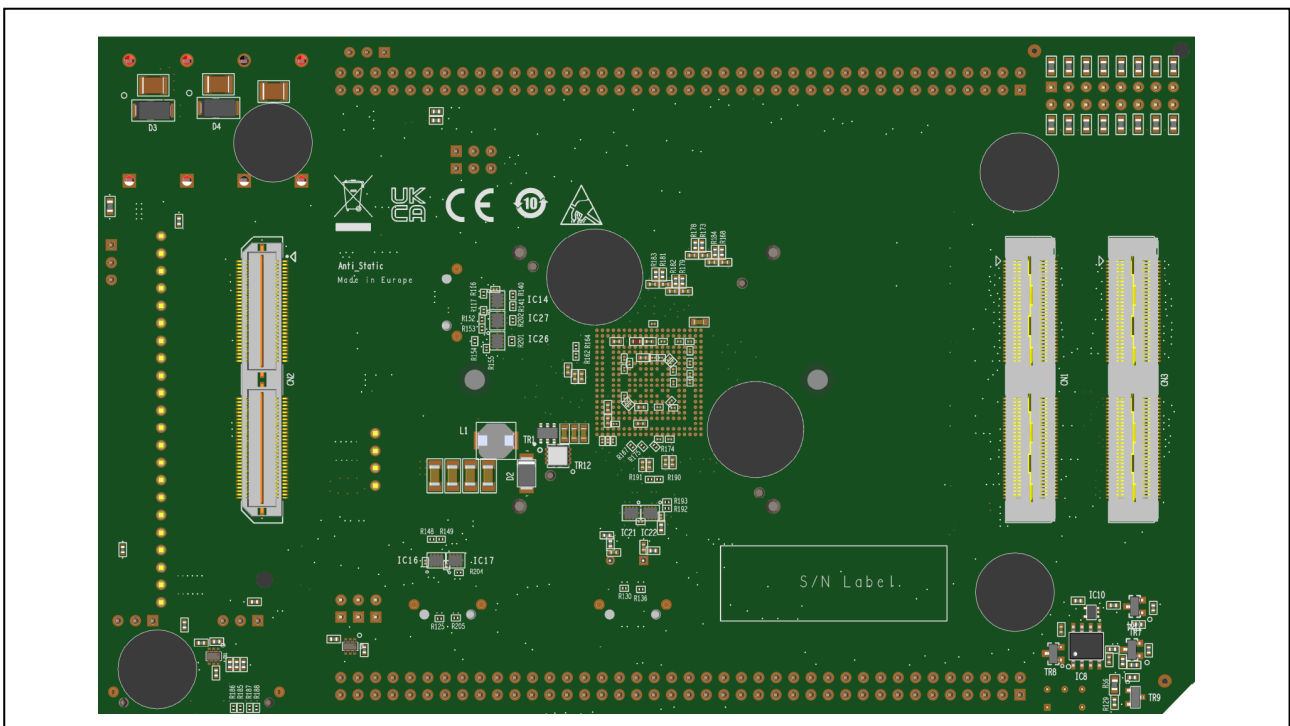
D018567_06_V03 Piggyback board bottom view
